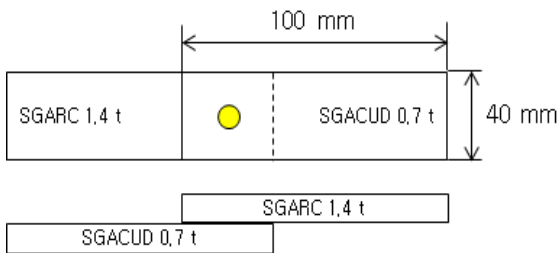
Schematic drawings of a two sheet of tensile test sample geometries.
